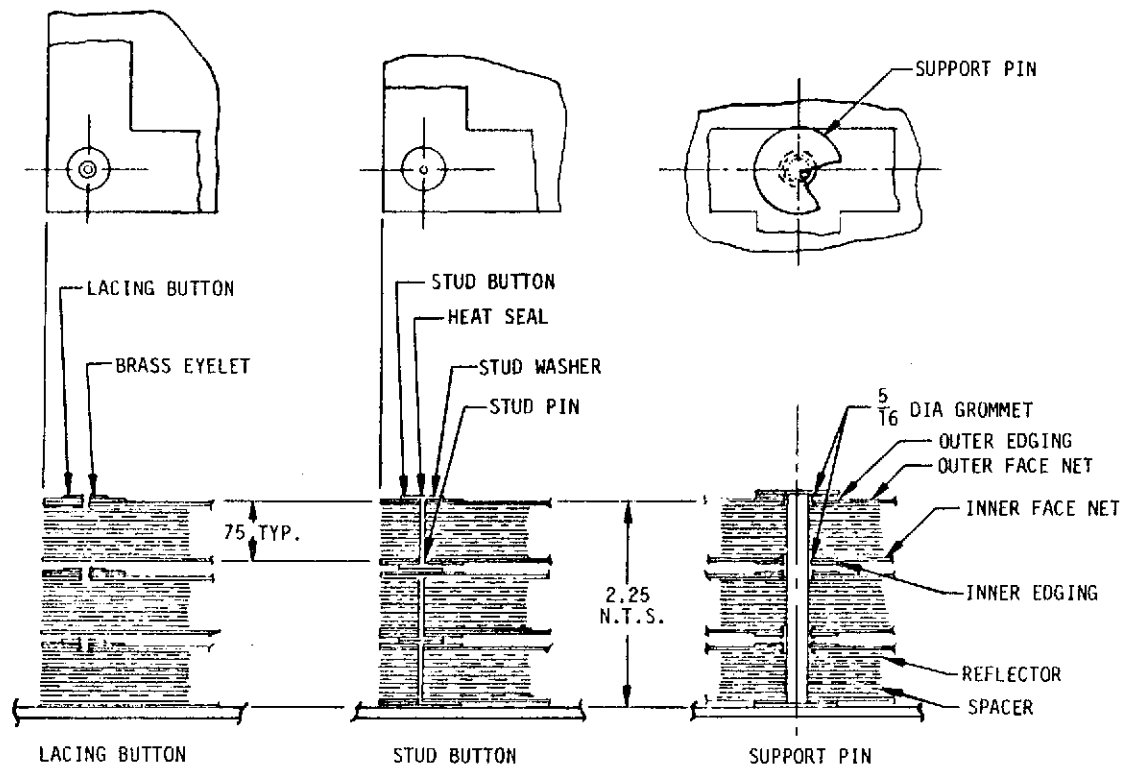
INSULATION PANEL CROSS SECTION
